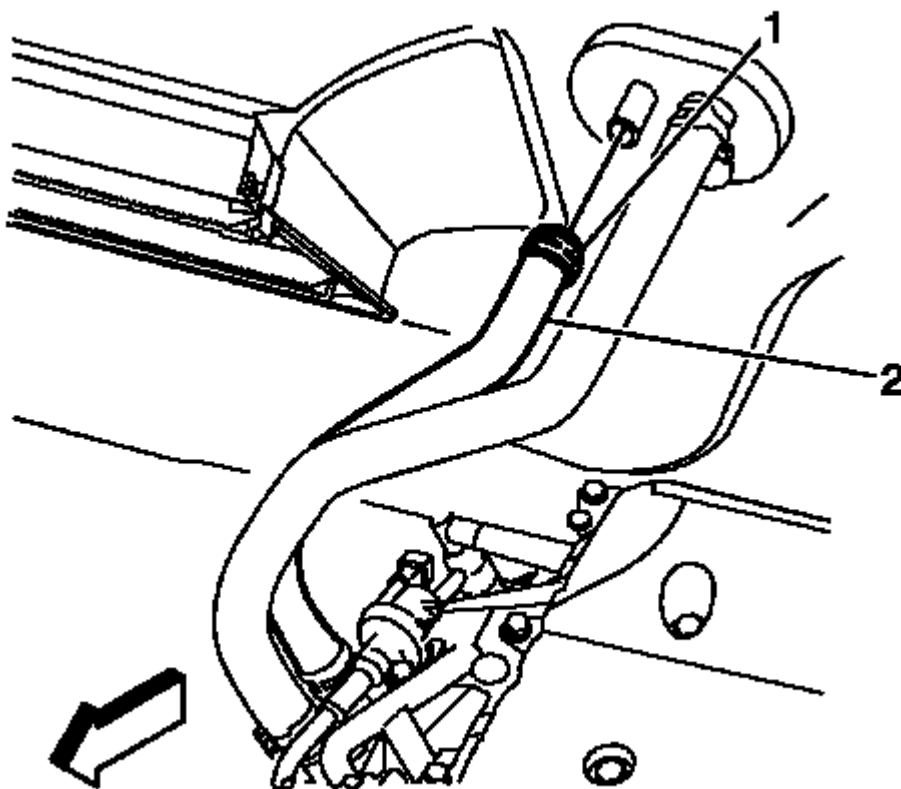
Heater Outlet Hose & Clamp At Heater Core
